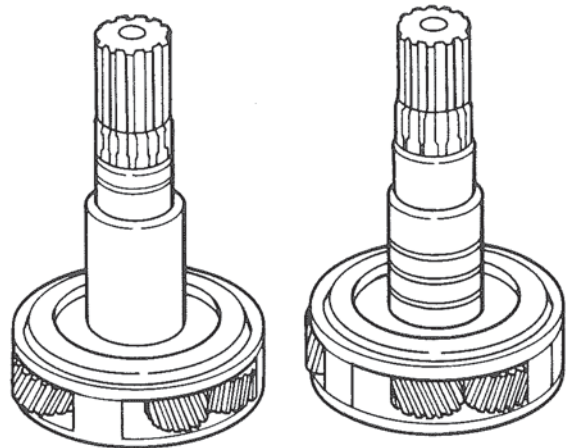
Grooved, Ungrooved Pinion Cage and Output Shafts.
